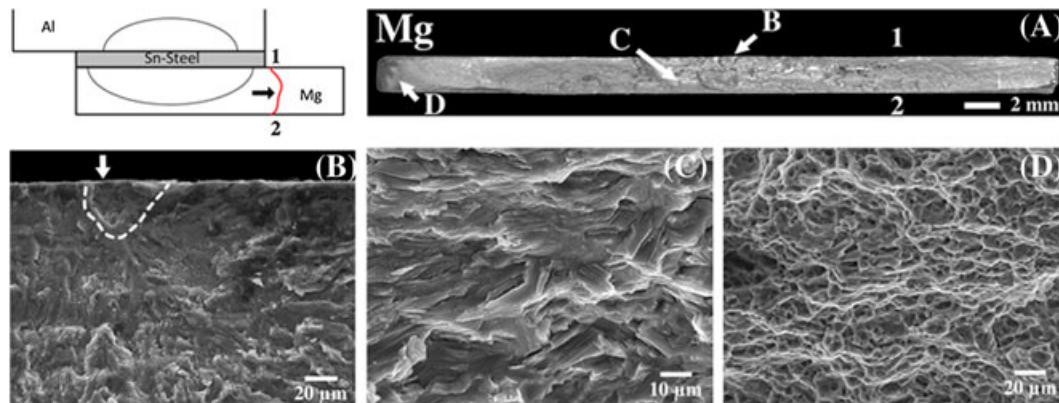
Fatigue fracture in Mg/Al joints with Sn-coated steel interlayer, Mg sheet, under $\Delta F = 0.7$ kN: (a) fracture surface overview, (b) location of fatigue crack initiation (region B as marked in panel a), (c) crack propagation region (C as marked in panel a) and (d) final fracture (region D in panel a). [Colour figure can be viewed at wileyonlinelibrary.com]
